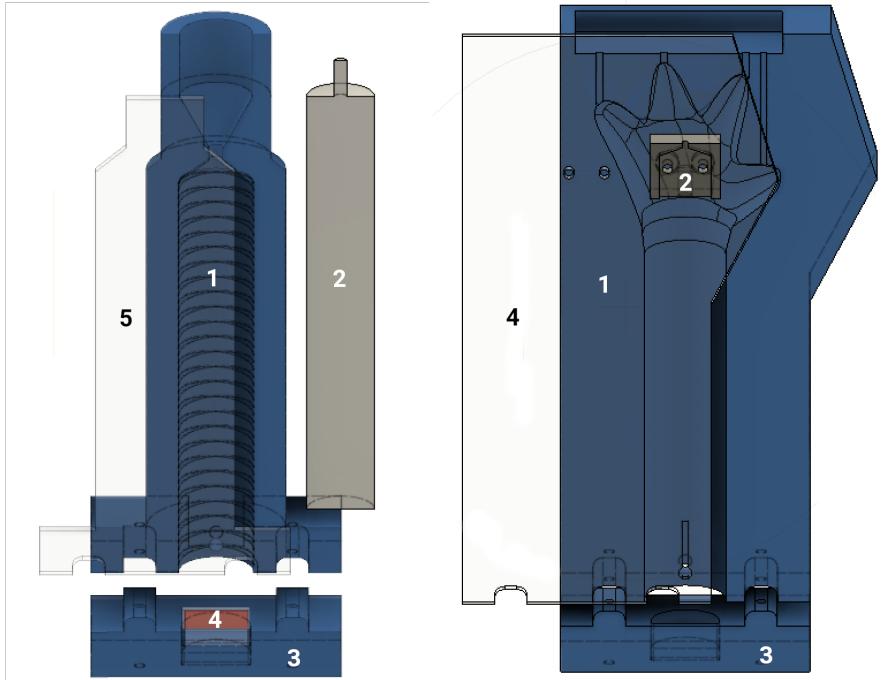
Arm steps 1 & 2: Left: Artificial muscle actuator mold, Right: Arm skin mold.
